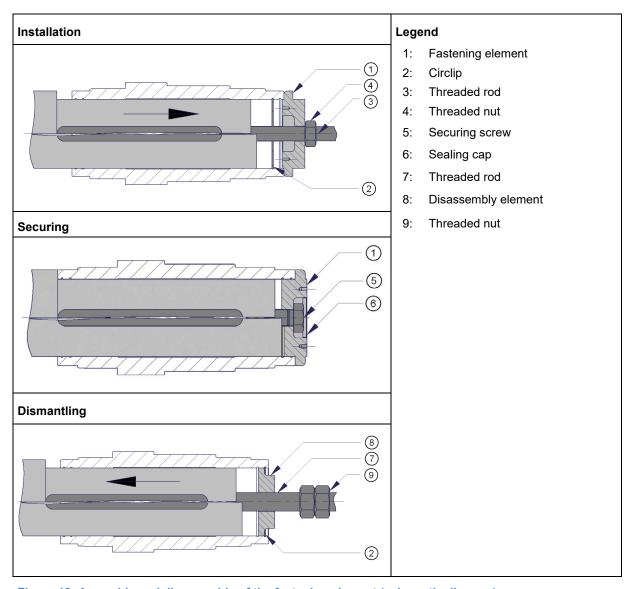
Assembly and disassembly of the fastening element (schematic diagram)
